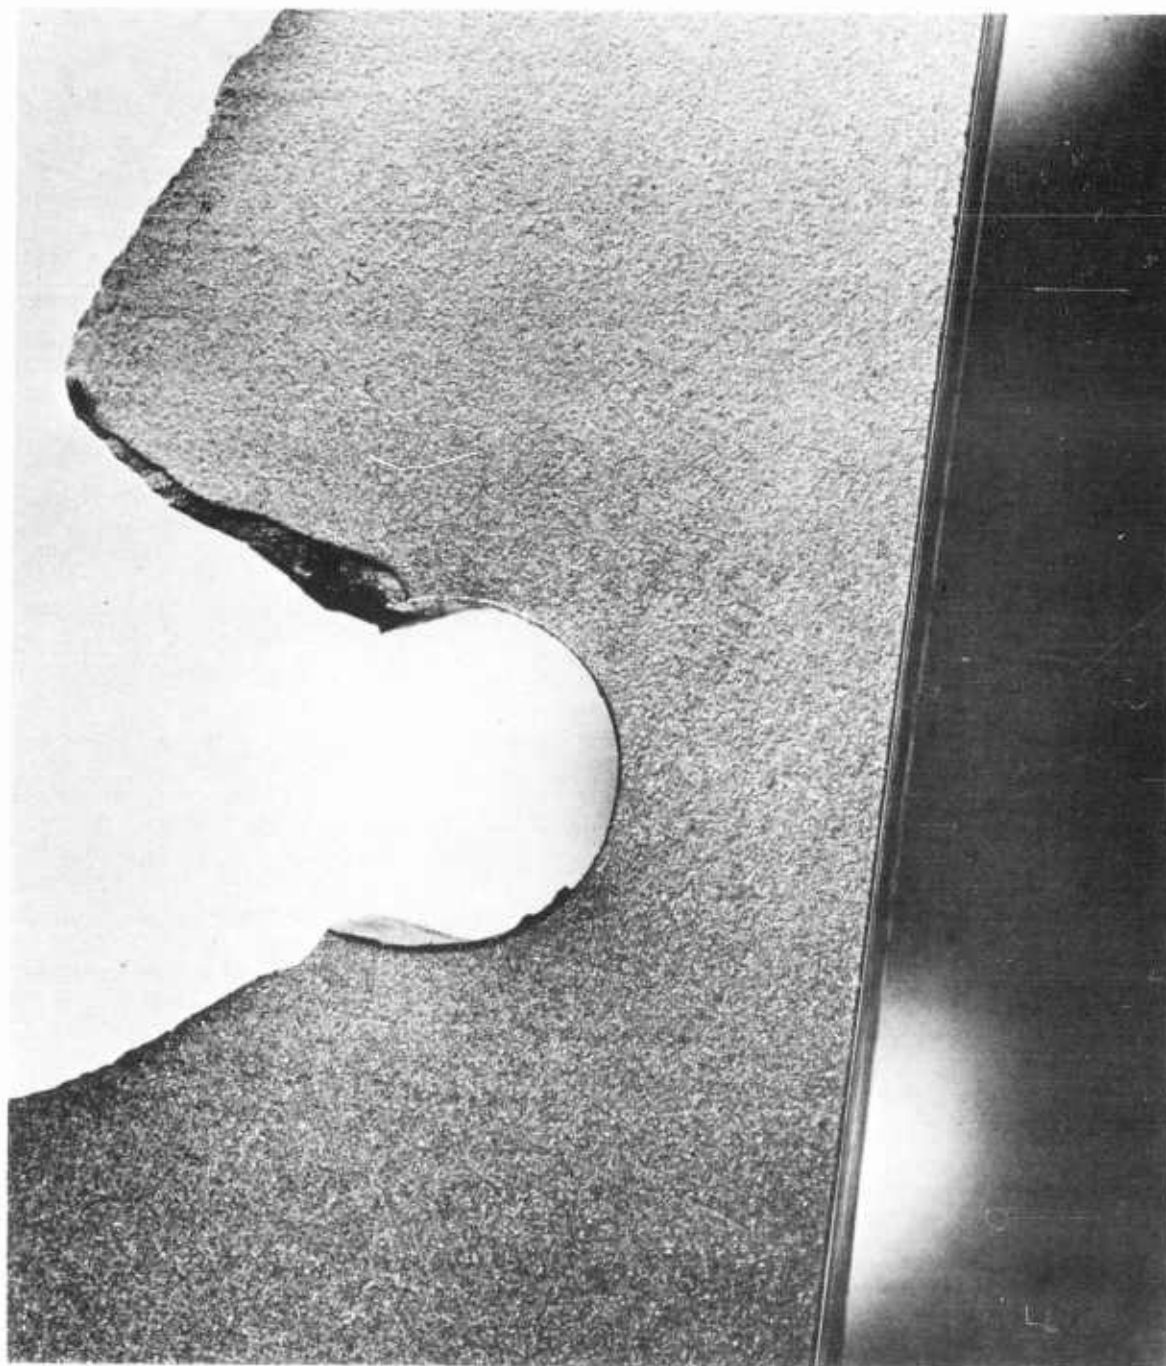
Rear Spar Fracture Area -- Burrs on Edge of Hole
